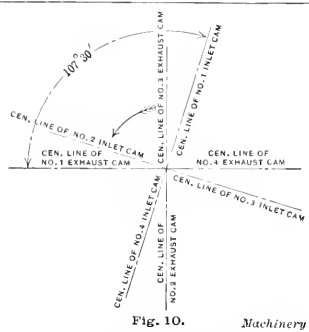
Diagrammatical End View of a Four-cylinder Engine Cam-shaft
